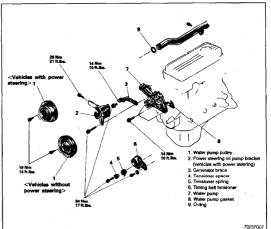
Water pump and related components—Mirage with 1.5L (4G15) engine
